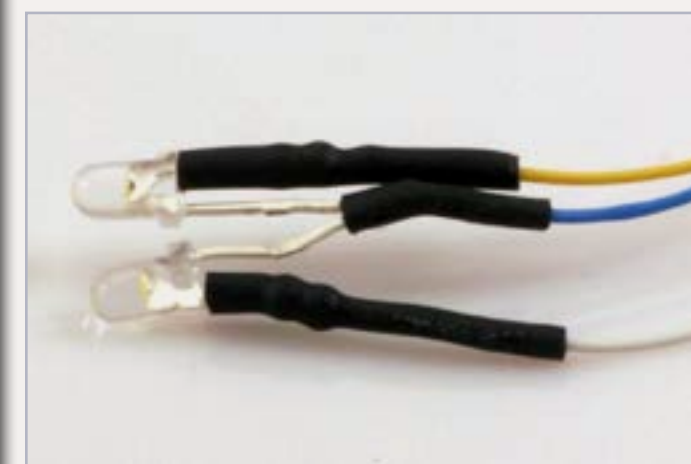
Life-Like Proto 2000 Cab Units – LED assembly.
